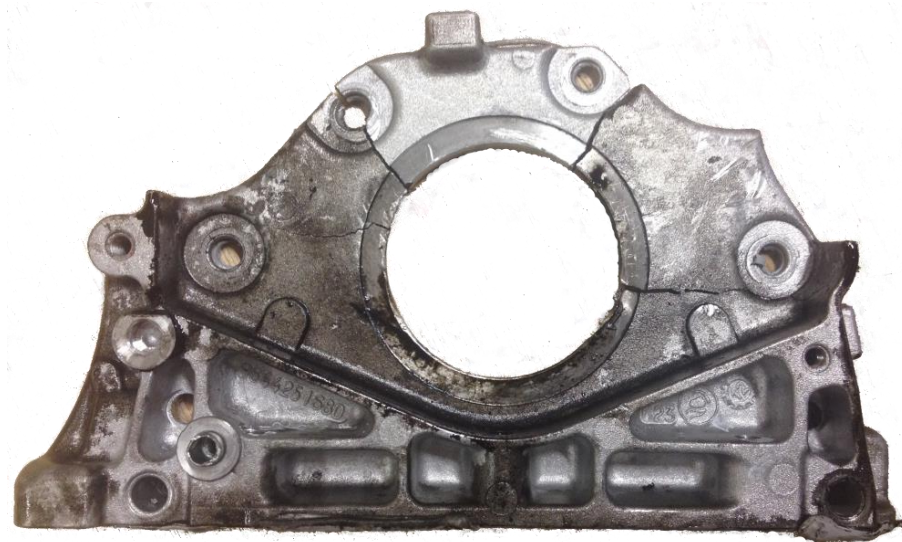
Casing damage caused by crankshaft failure
